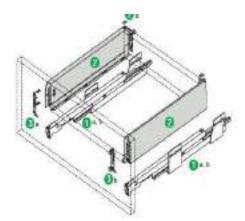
TYPICAL DRAWER SLIDES DETAILS
